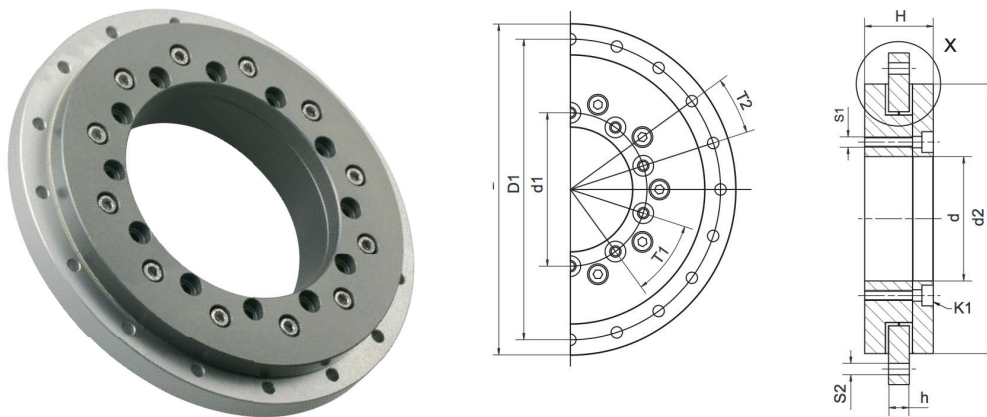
Slide bearing, iglide PRT slewing ring bearing. [13]
